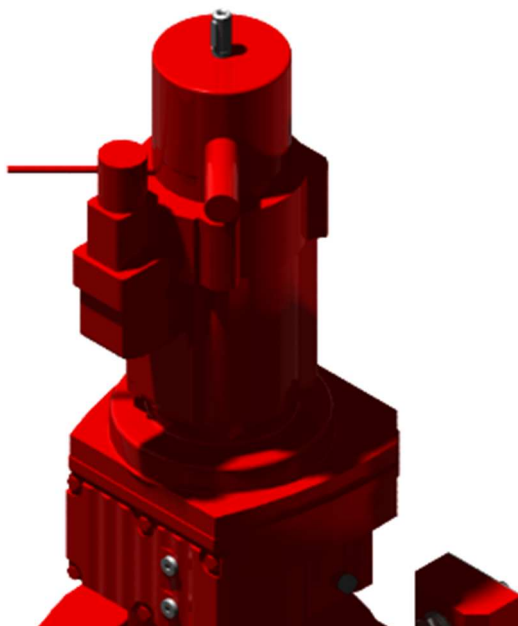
Detail of Azimuth motor brake, hand release and emergency shaft
